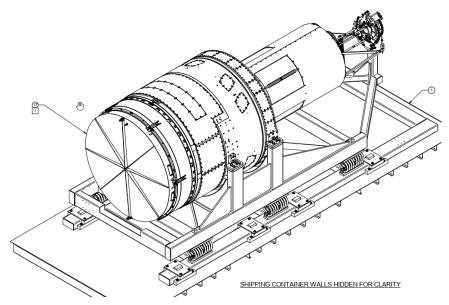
CAD drawing of the LSST Camera assembly installed on shipping frame, mounted to the shipping container floor.
